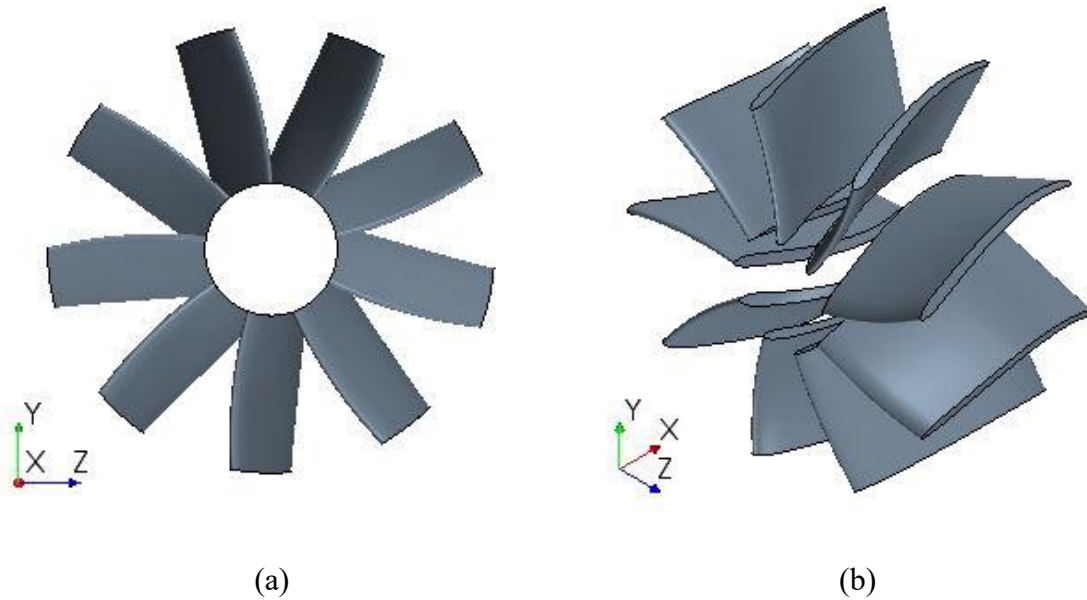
CAD for the Proposed hubless turbine stator (a) Front view (b) Isometric view
